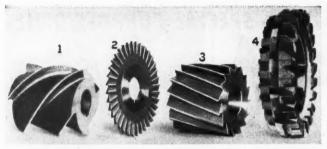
Milling Cutters Used on Aluminum Alloys: (1) Helical Type, (2) Finning (Slitting) Type, (3) Plain Type, (4) Inserted Blade Type
